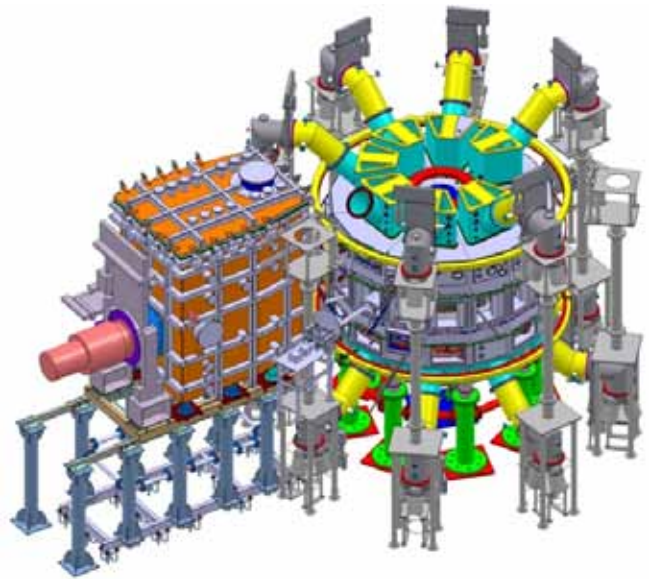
3D view depicting the assembly of Neutral beam injector in SST1 tokamak
